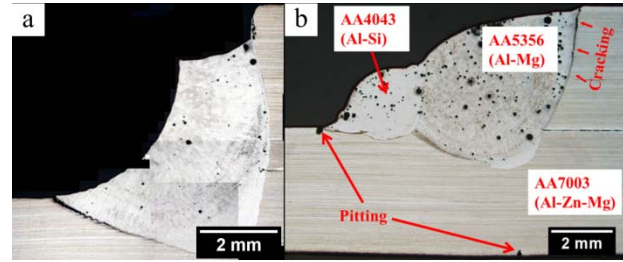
Macrographs of acid tested specimens, where a) milled; b) PAD
